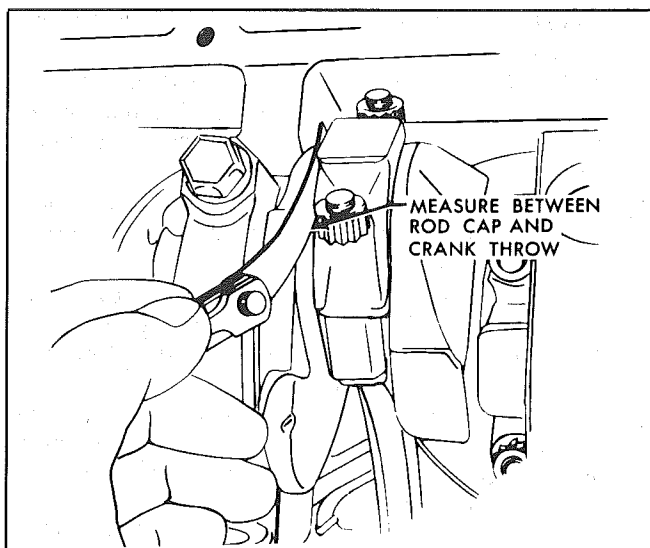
A2-23 Measuring Connecting Rod Side Clearance
